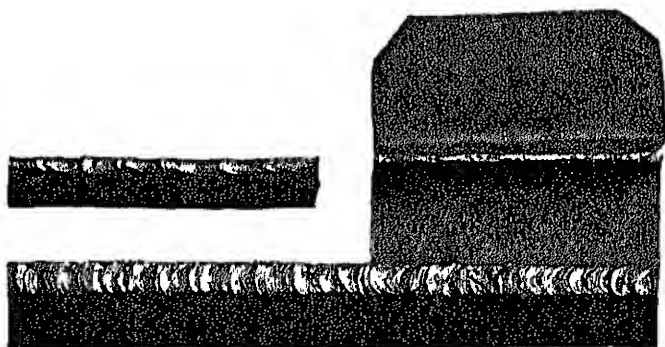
Flanged Edges Welded with Graphite Arc.
